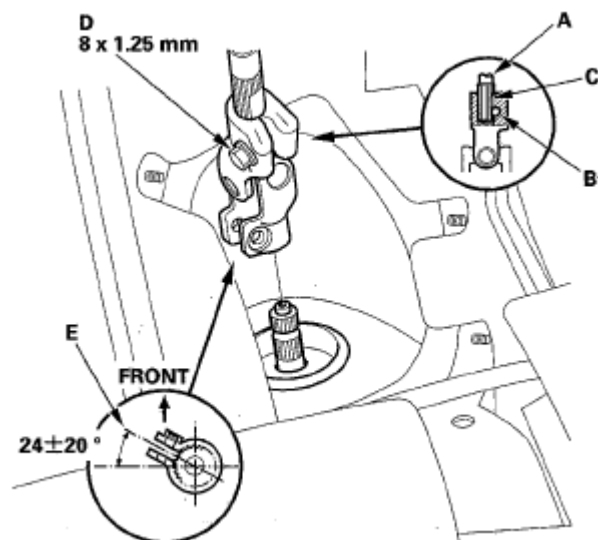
Identifying Upper Of Steering Joint Onto Steering Shaft
